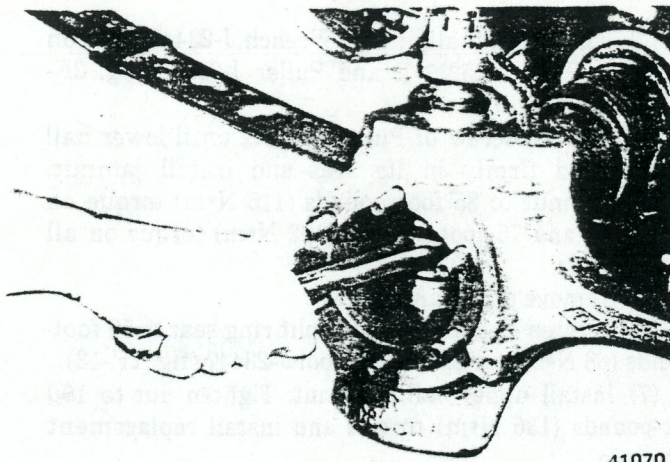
F-7 Lower Ball Stud Jamnut Removal
